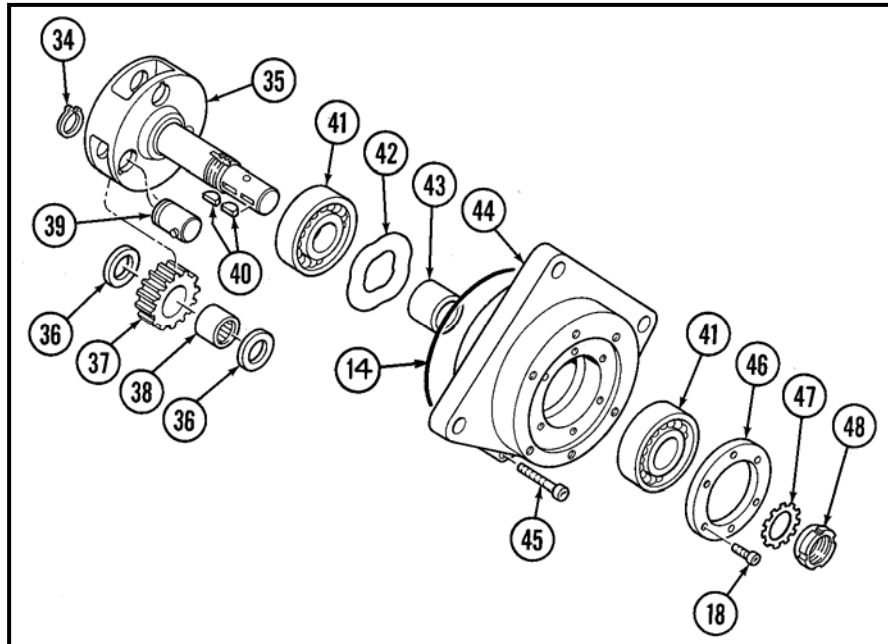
Gearbox Assembly (T112D/T121D STD MESH)
